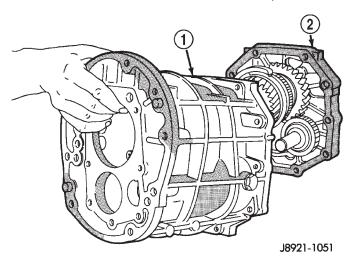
Install Transmission Gear Case to the Intermediate Plate
